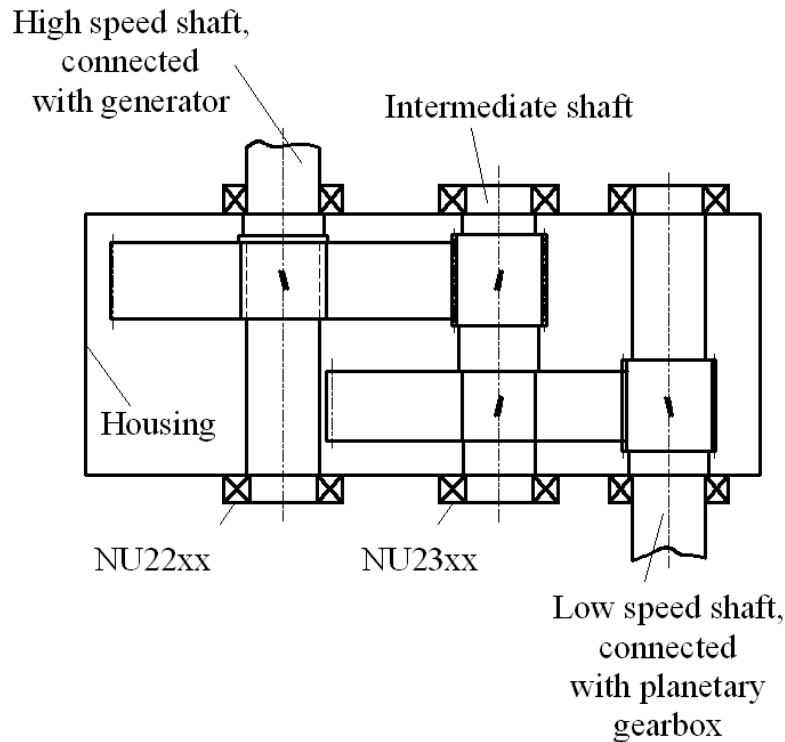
The schematic of two-stage helical gearbox of 1MW wind turbine
